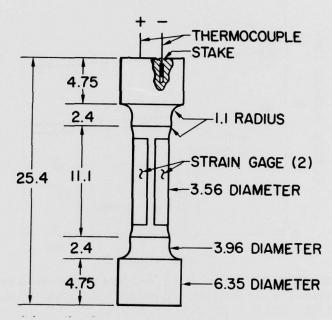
Schematic of the tensile specimen showing the double reduction gage section, the location of the strain gages, and the method of attaching the thermocouple leads. Dimensions are in mm (1 mm = 0.0394 inches).
